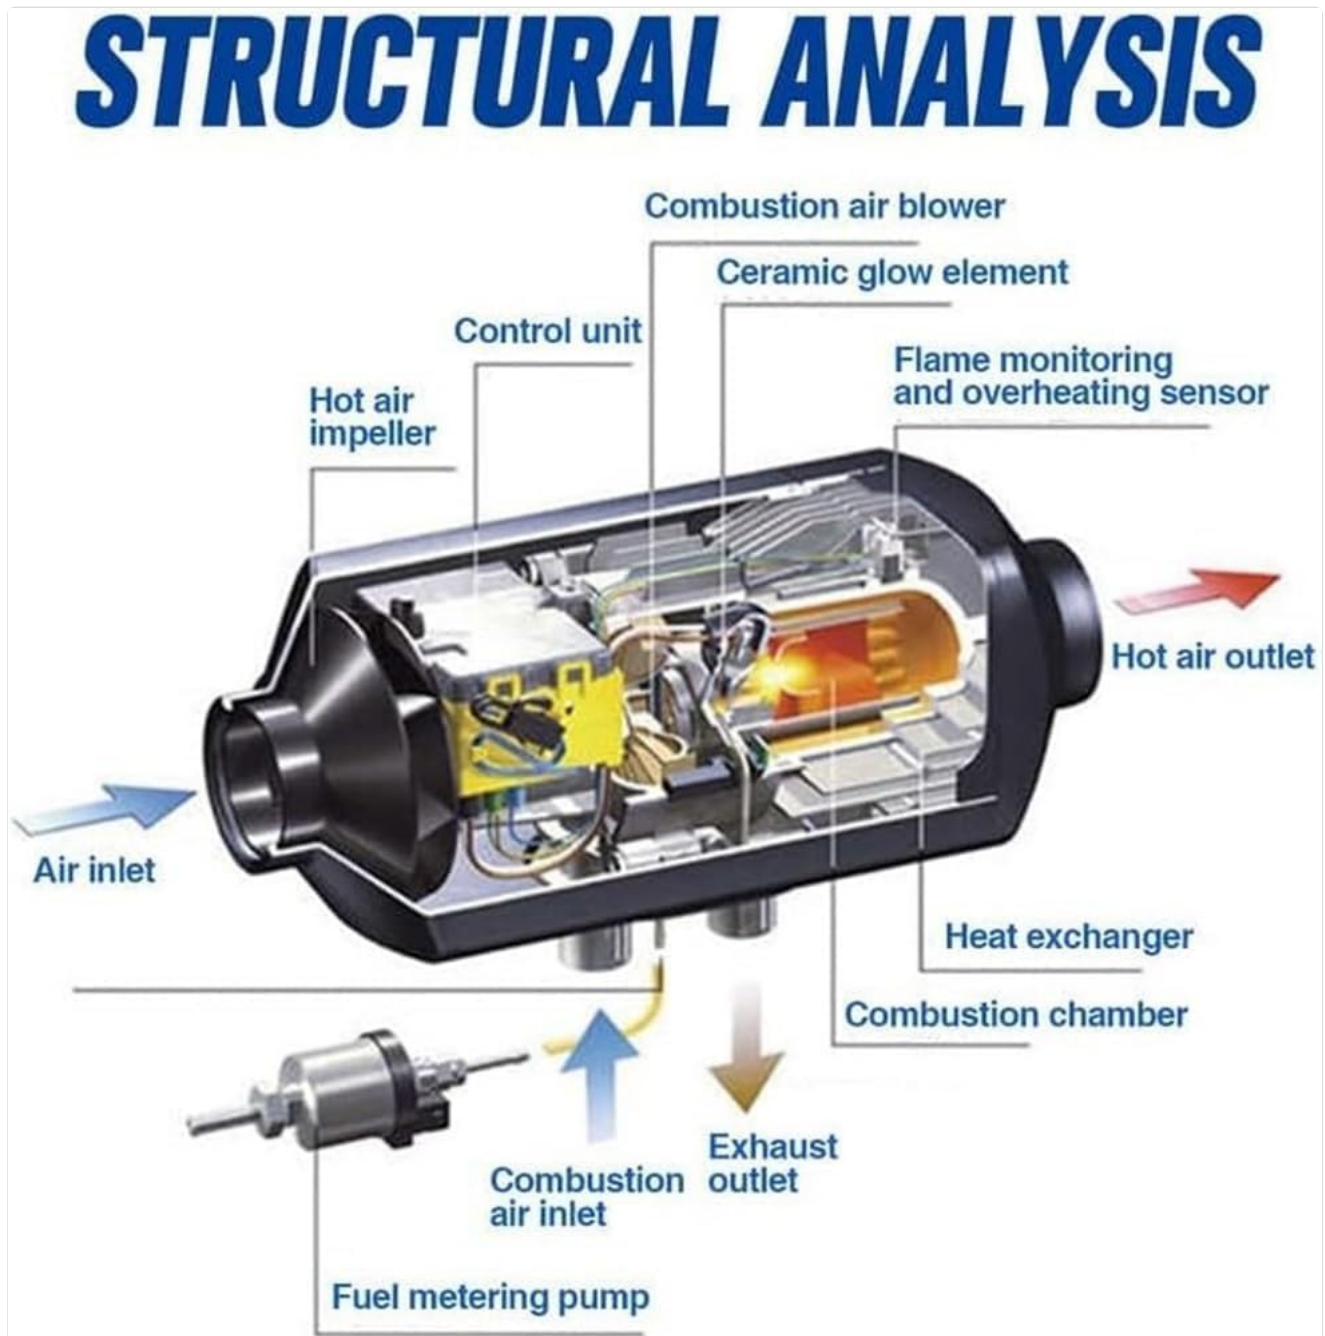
Internal structure of the CHIPEL Diesel Air Parking Heater. Key components include the combustion air blower, ceramic glow element, control unit, hot air impeller, flame monitoring and overheating sensor, heat exchanger, and combustion chamber. Air enters through the air inlet and combustion air inlet, and hot air exits through the hot air outlet, while exhaust exits through the exhaust outlet.
